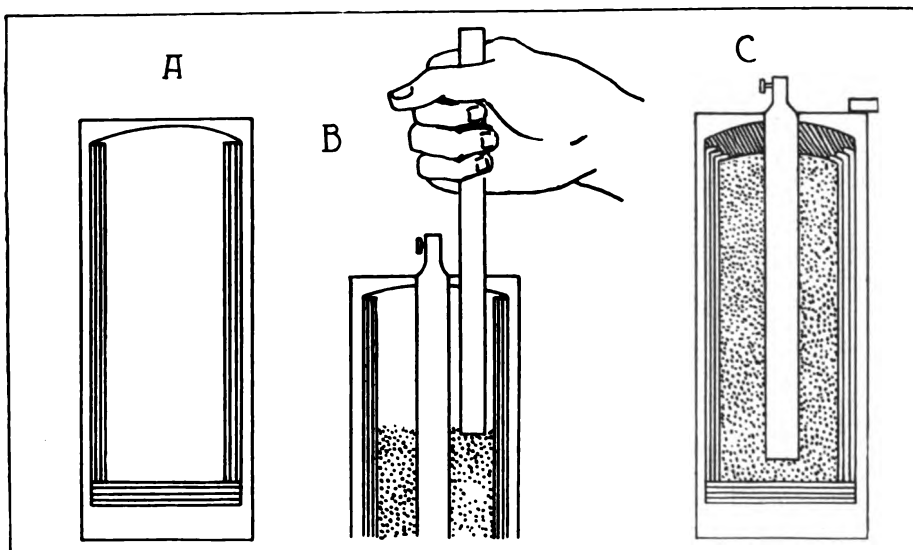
A, Arrangement of Blotting Paper in Zinc Shell; B, Tamping Down Filler; C, Fully Constructed Dry Cell.
